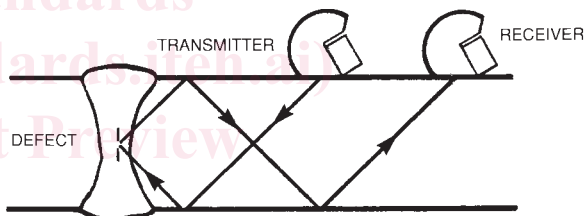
Two-Search-Unit Technique 4, for Use with Thick Weldments
